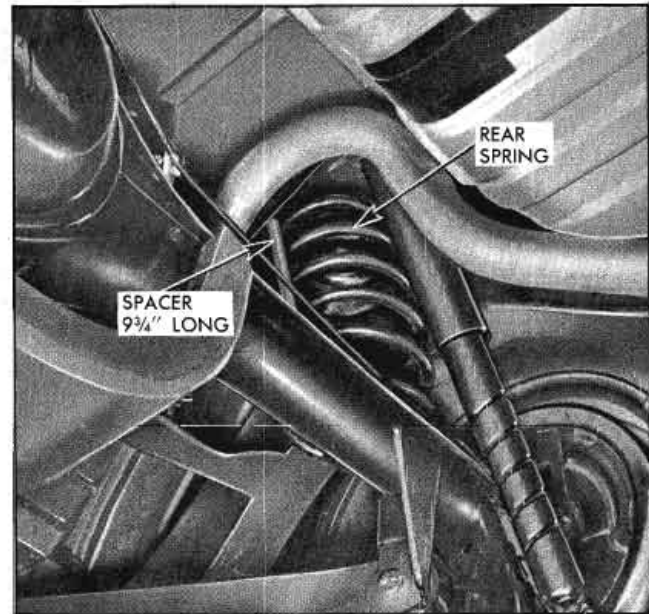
Spacer Inserted to Set Rear Suspension
